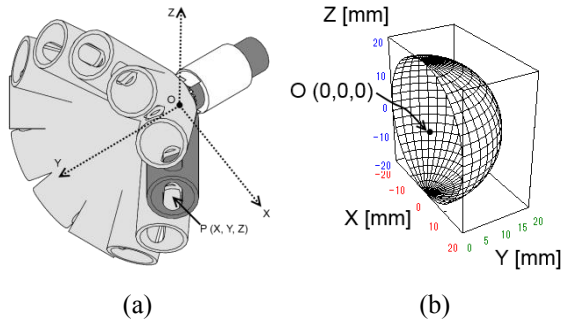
Rotating mechanism, (a) Rotating model of bending distal end, (b) workspace of bending distal end.
